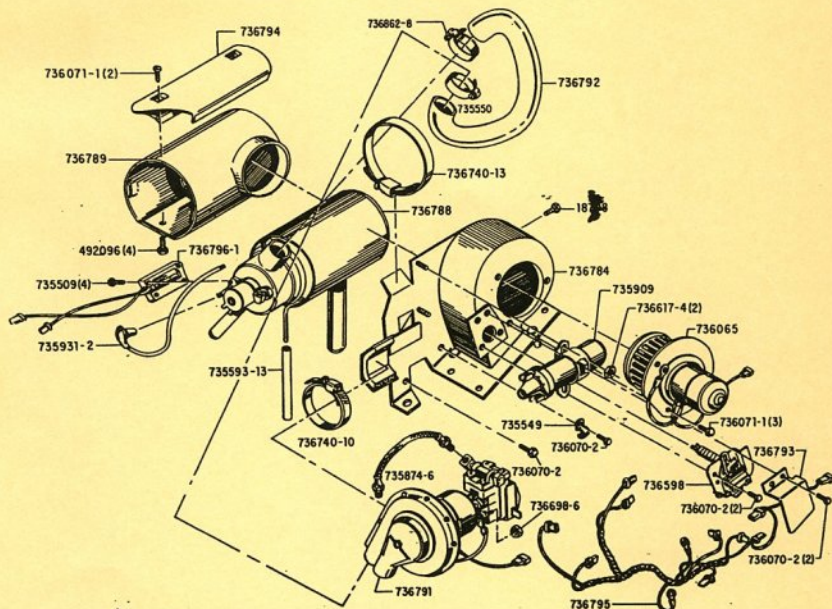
HEATER ASSEMBLY 736783 USED ON KIT 8345-B
